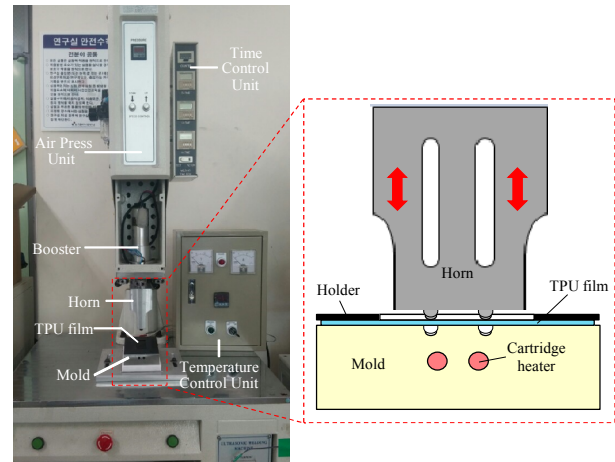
Configuration of ultrasonic thermoforming system with a detail view of the forming section.
